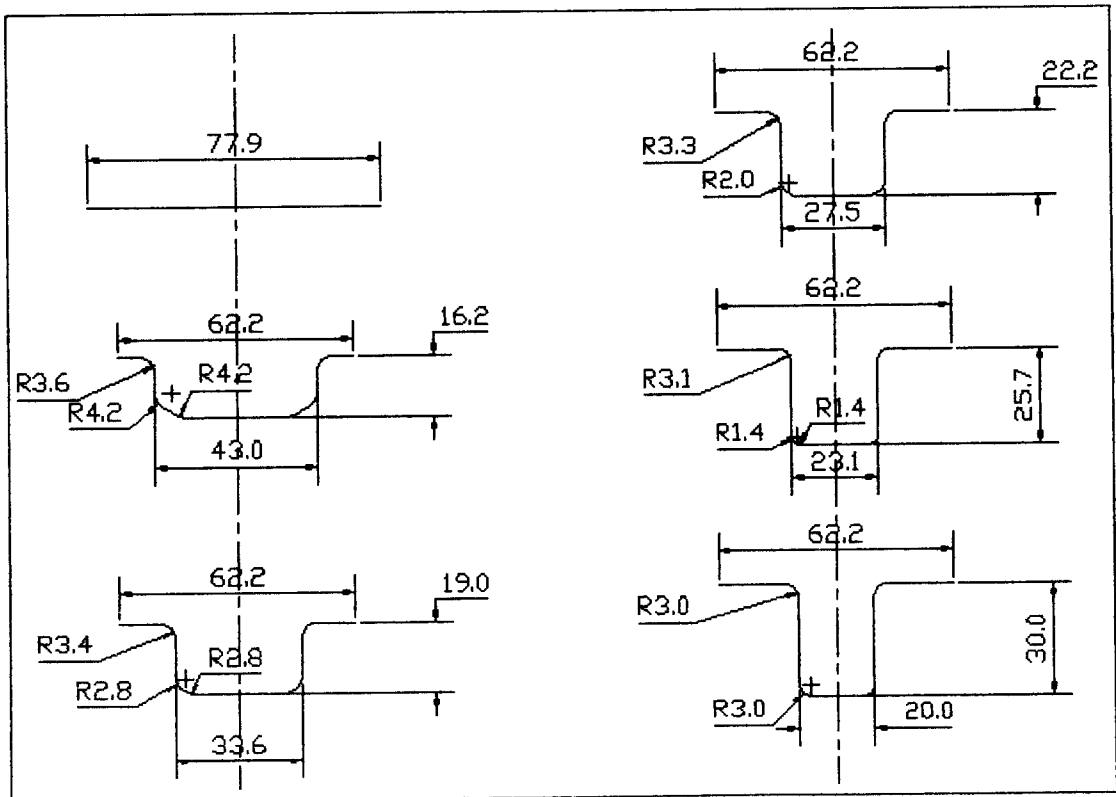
Details of Each Drawing Step ($T = 0.5 \text{ mm}$)
